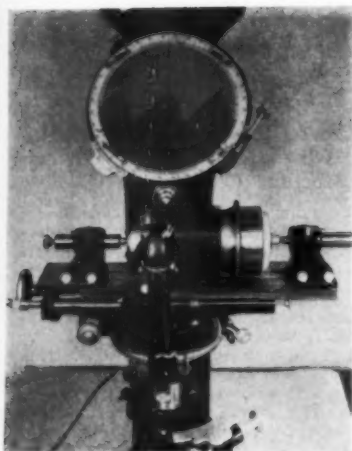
Closeup of a Comparator set-up for inspecting buttress threads on airplane cylinders.
